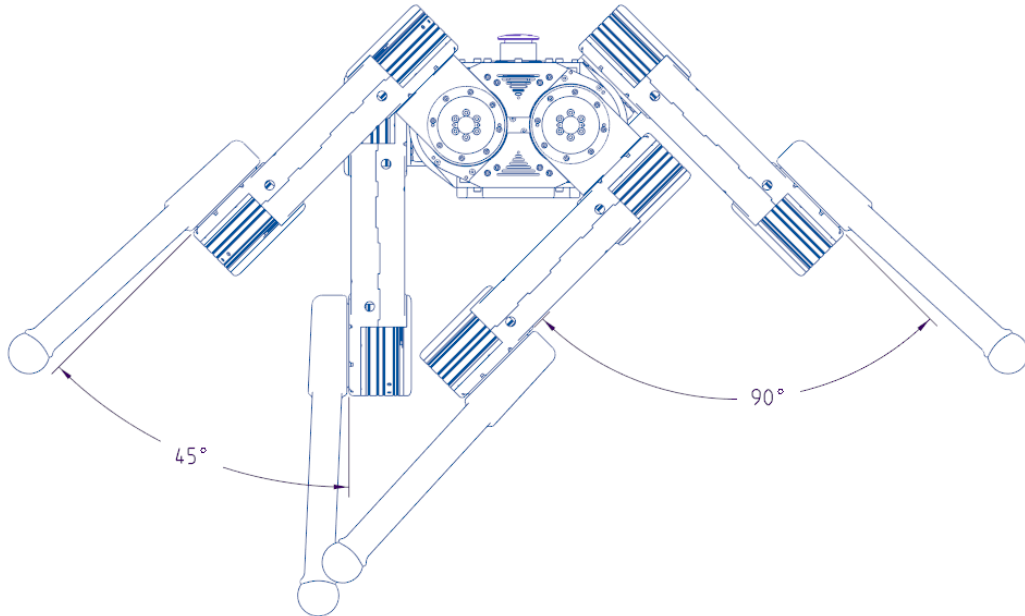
Technical drawing showing Leon's front view and presenting the workspace of the robot's hip-pitch joints.
